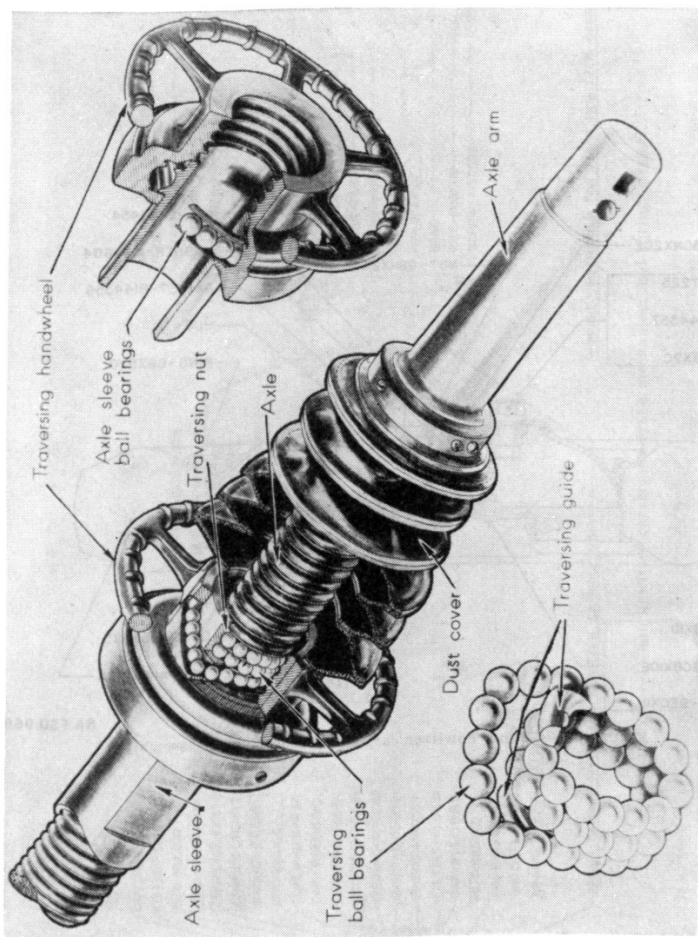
75-mm pack howitzer carriage, M1—traversing handwheel mechanism.
